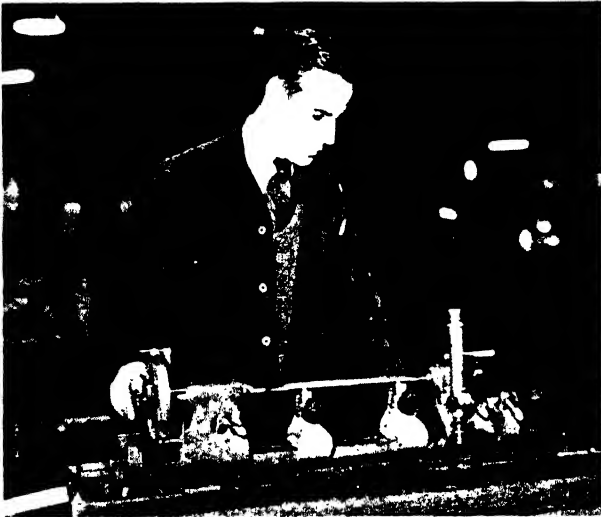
APPRENTICE FITTER CHECKING THE MEASUREMENT OF A LENGTH GAUGE
